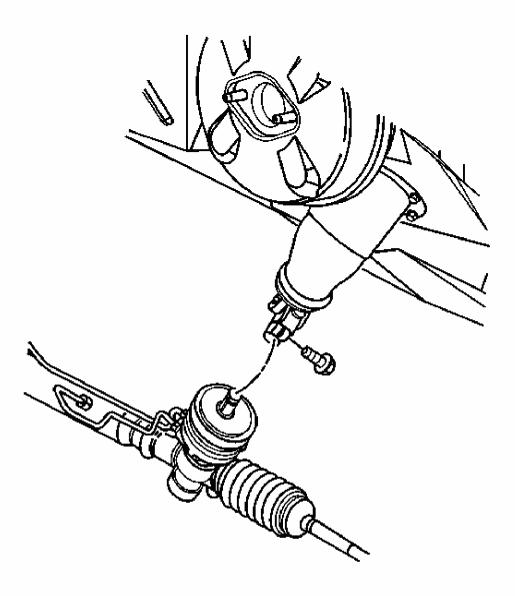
Locating Steering Rack-To-Intermediate Shaft Pinch Bolt Courtesy of GENERAL MOTORS CORP.
